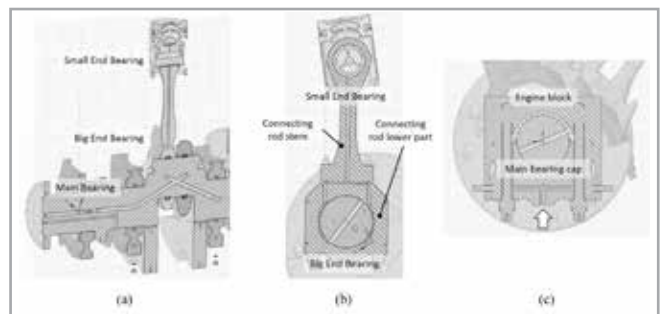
Internal lubrication channels. Crankshaft (a), connecting rod (b) main bearing cap, main bearing channel and engine block (c).
